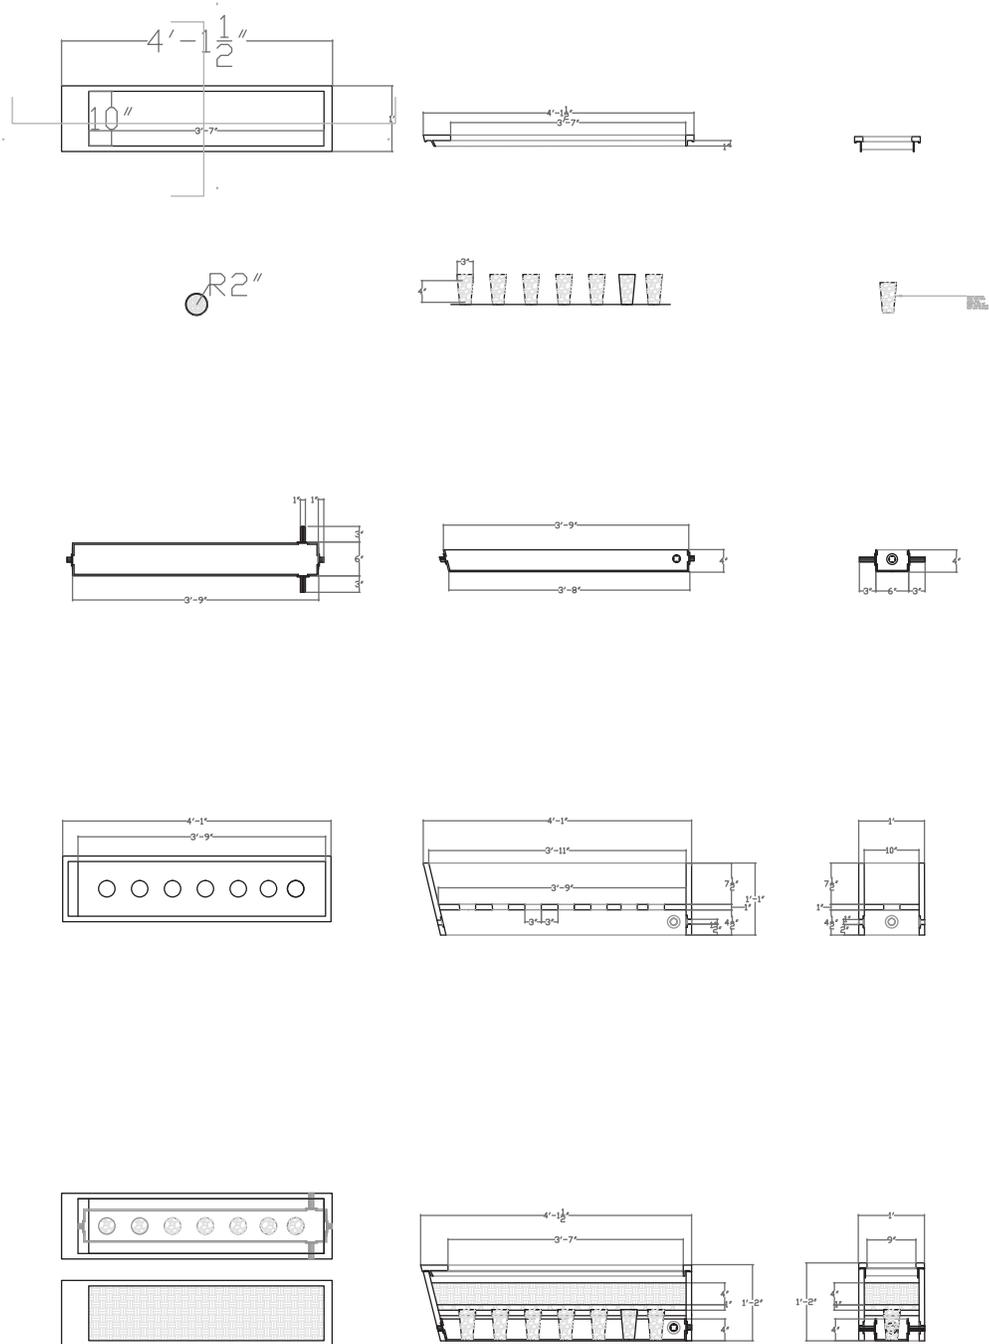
FIGURE XV: SHORT PLANTER INTERNAL DETAILS
